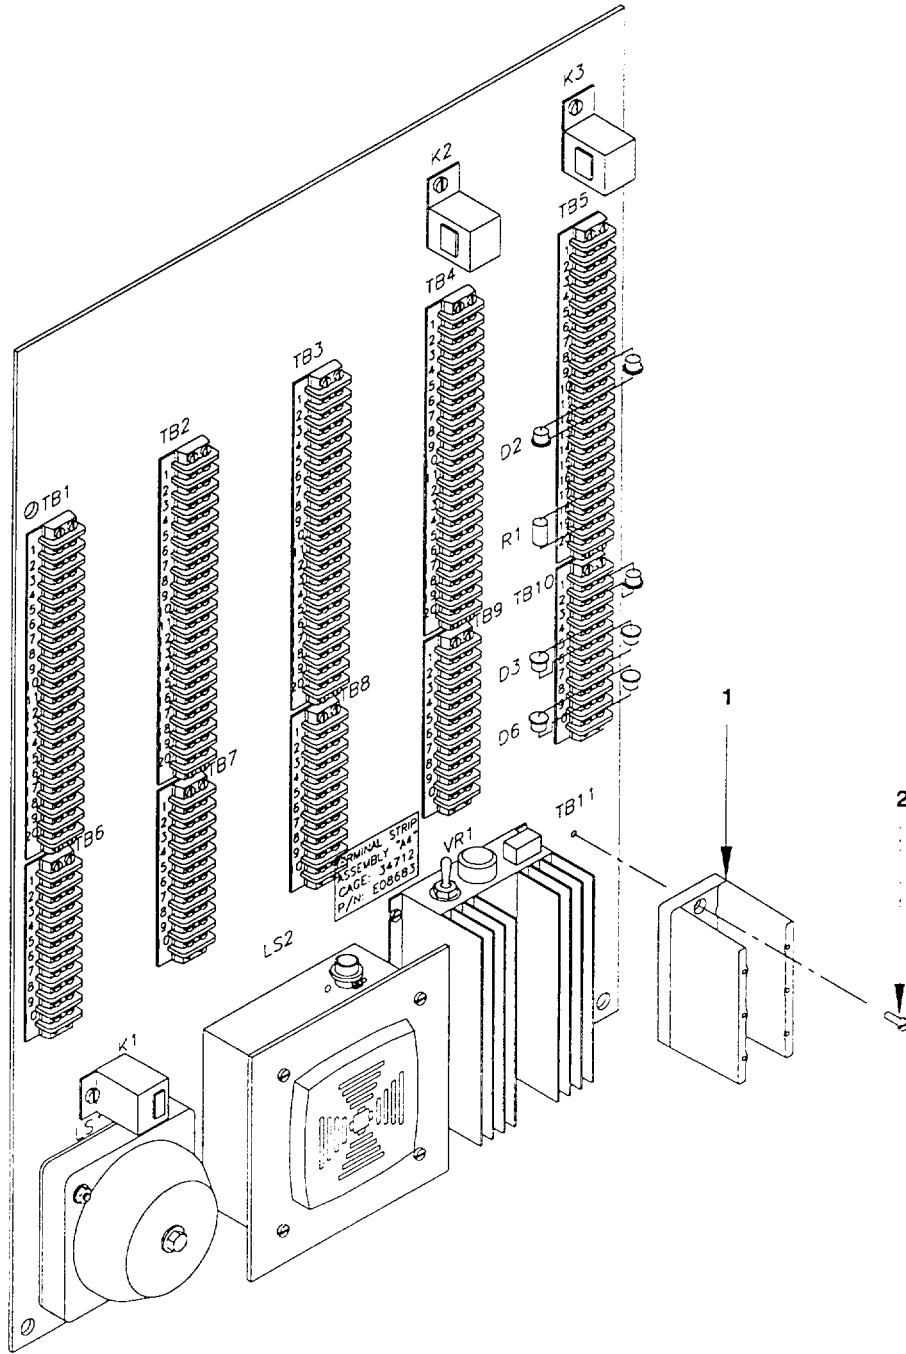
Power Distribution Block, Terminal Strip "A4". Remove/install
